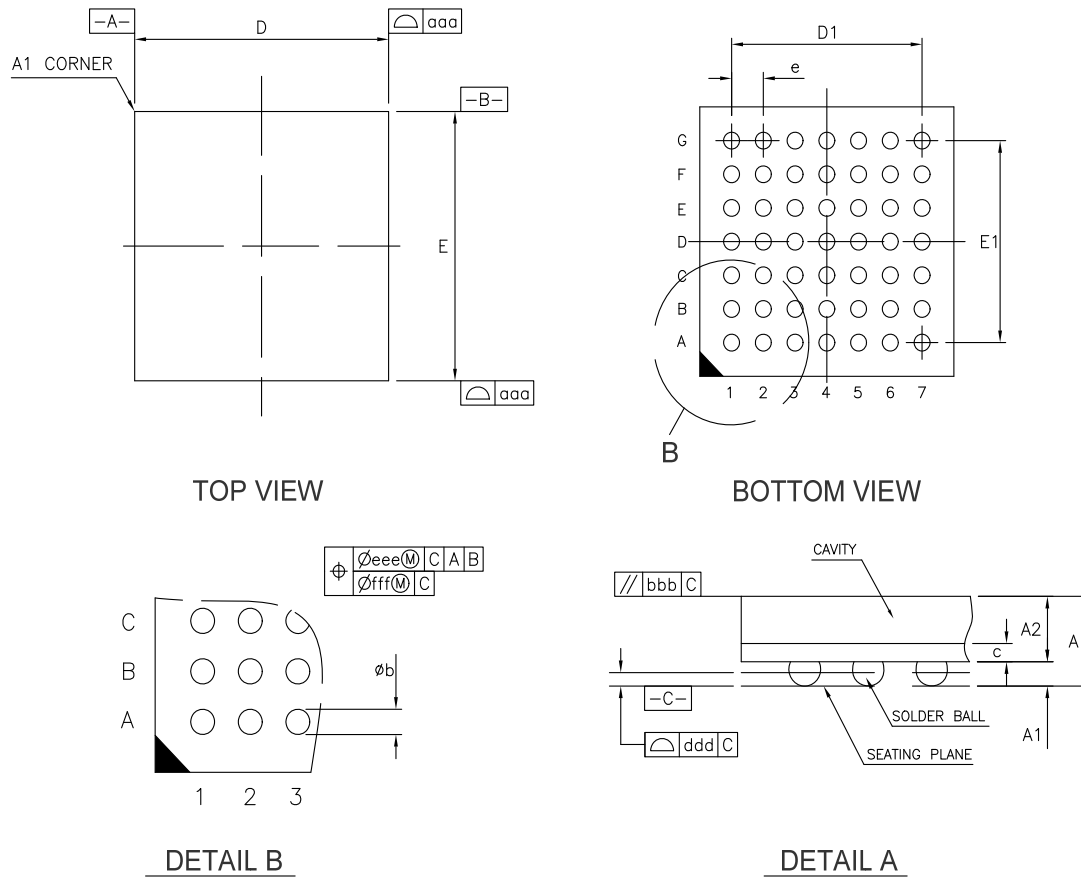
49-ball VFBGA Package Diagram (SiI902nAYBT)
